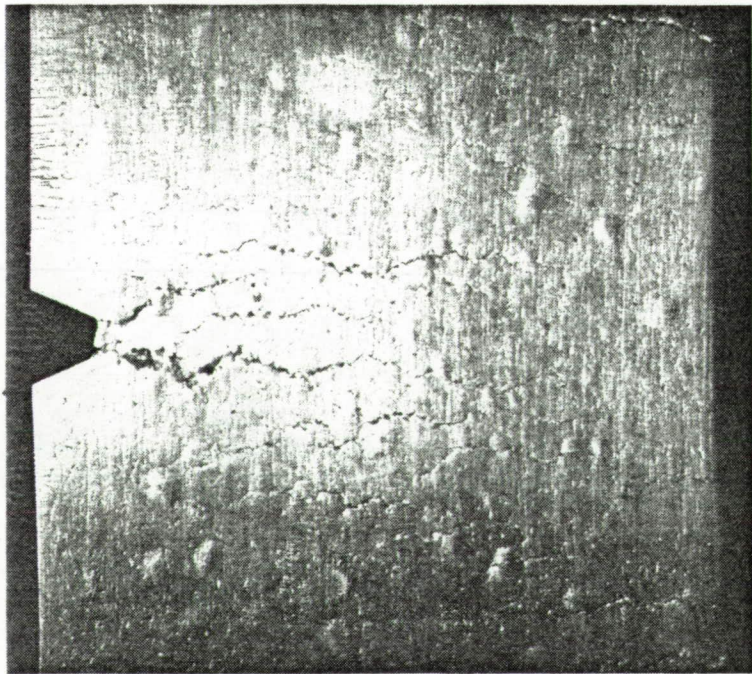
Surface crack pattern of Specimen No. V-T2 after three fatigue cycles.
